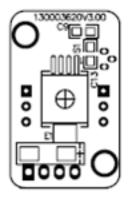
Paw Pressure Sensor Board, Bottom View
